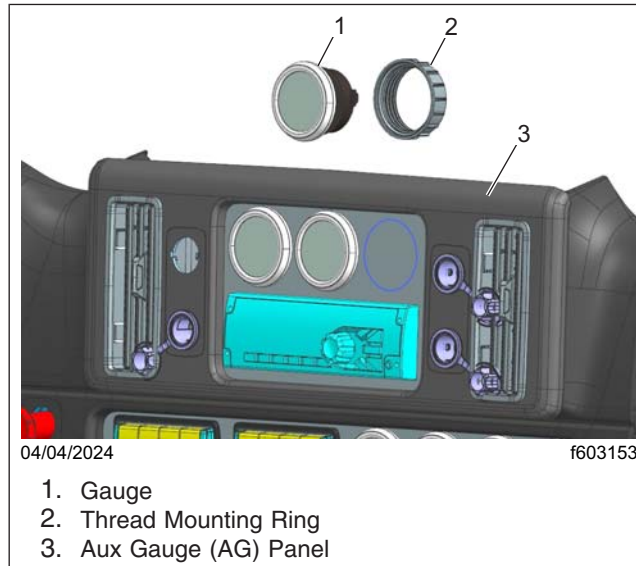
, Typical Gauge Installation (Upper Panel Shown, Lower Panel is Similar)
